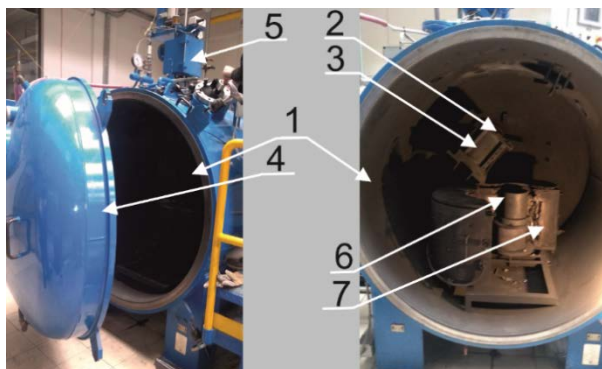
The Seco-Warwick VIM-20 vacuum induction melting furnace: 1 – the furnace chamber, 2 – the crucible, 3 – the induction coil, 4 – the door to close the chamber tightly, 5 – the measurement system, 6 – the ingot mould, 7 – the ingot mould heater
